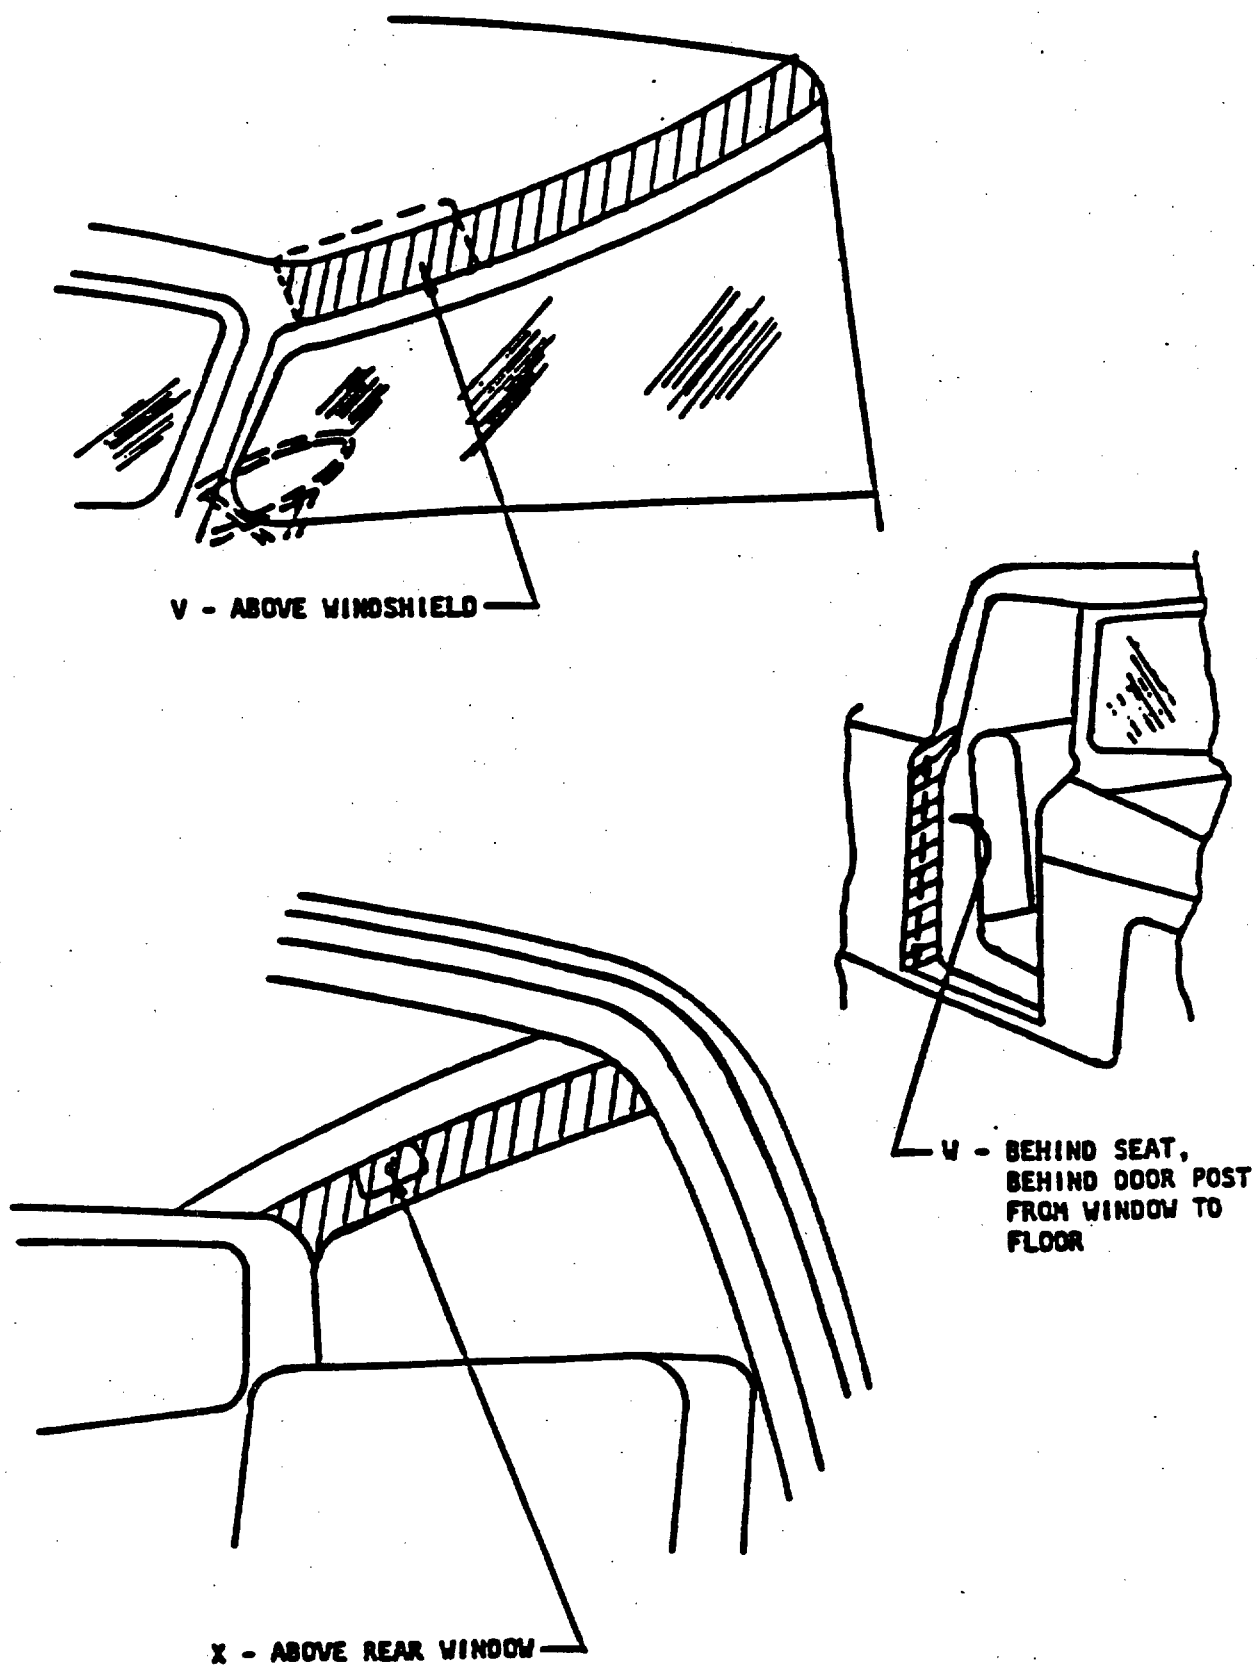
Rustproofing inside cab section - truck assembly - continued.
